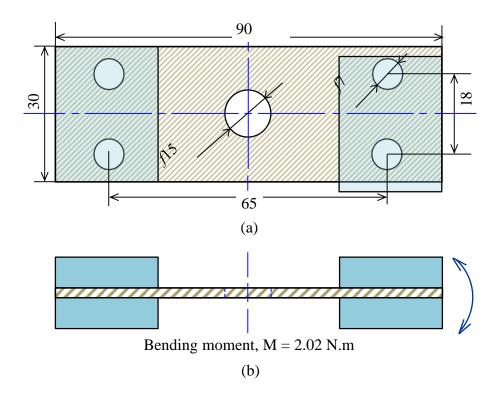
Procedure of bending fatigue test. (a) Dimension of specimen and (b) bending moment used for test.
